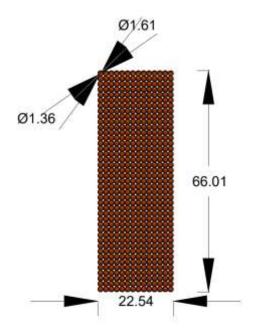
Layout of each H.V. coils (all dimensions in mm)
